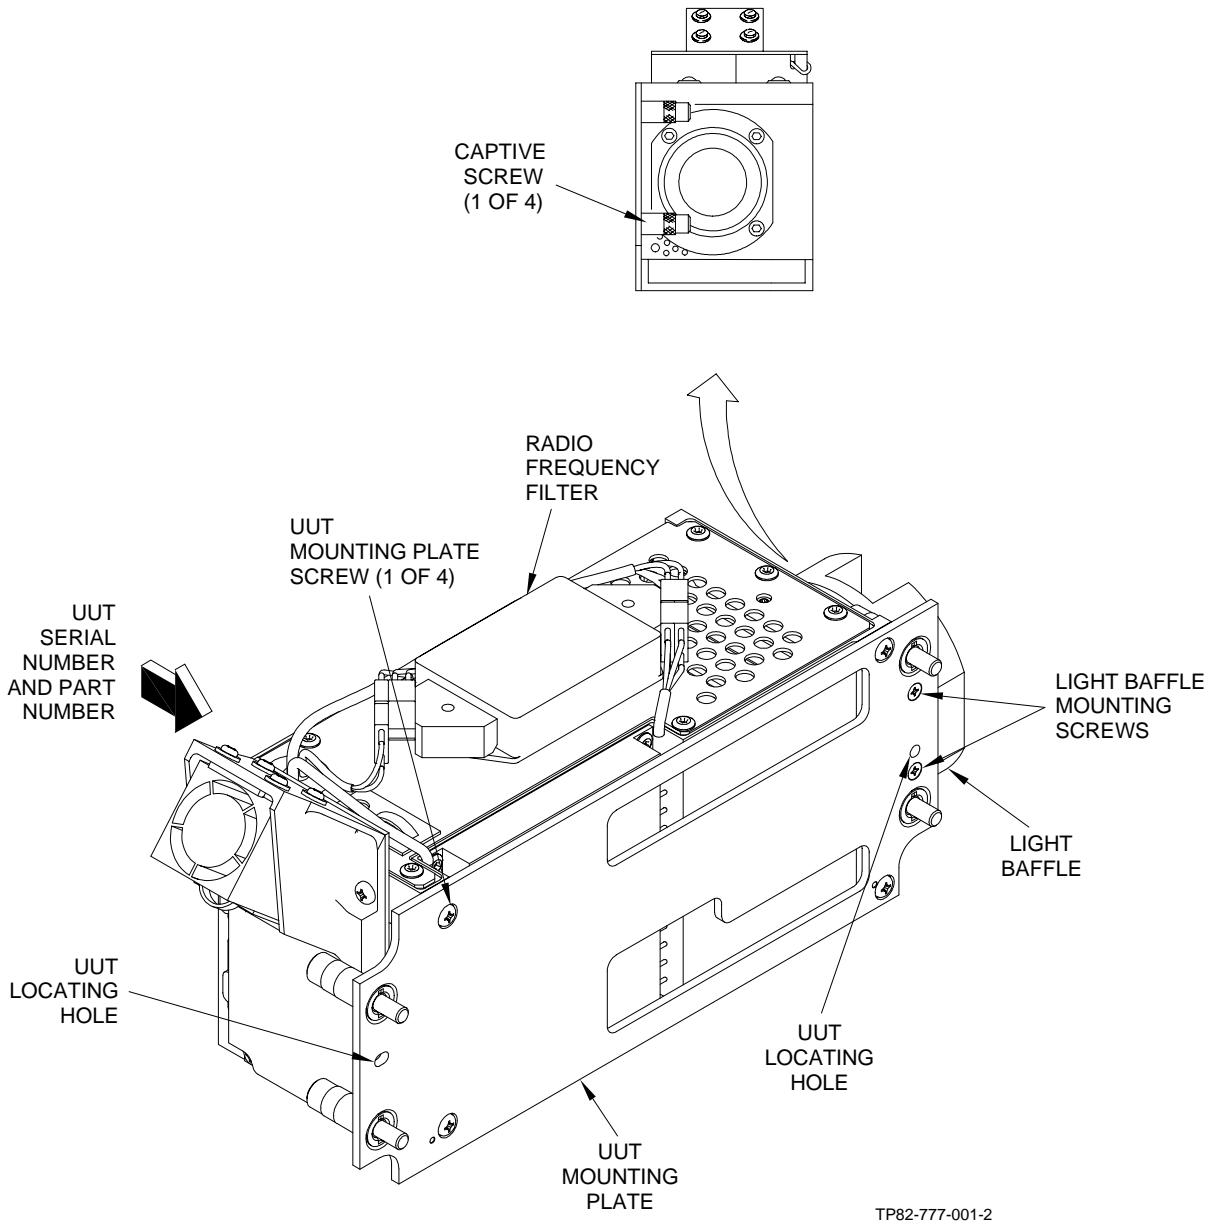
Solid State Camera Assembly - DAY TV Physical Configuration
